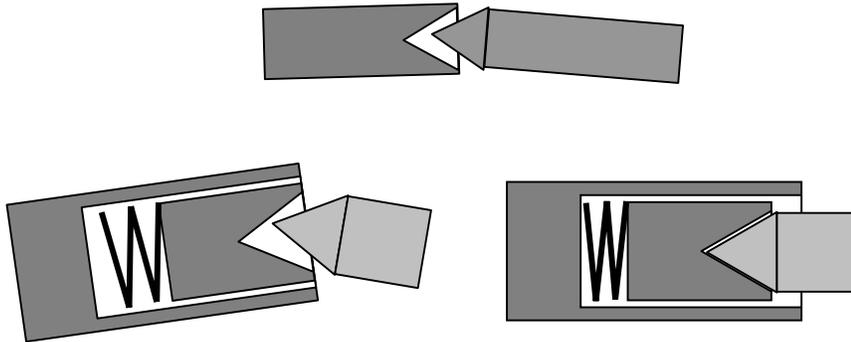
Upper sketch: Connector halves designed as mating taper and counter sunk shapes for automatic alignment. Lower sketch: Separation of alignment and engagement using a spring to be compressed as alignment is completed and engagement starts.
